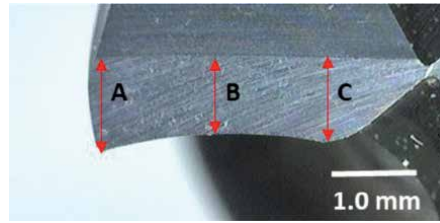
Measurement of tool wear is taken as the change in flank length indicated by A, B, and C after drilling each 10th hole compared to the initial flank length.
